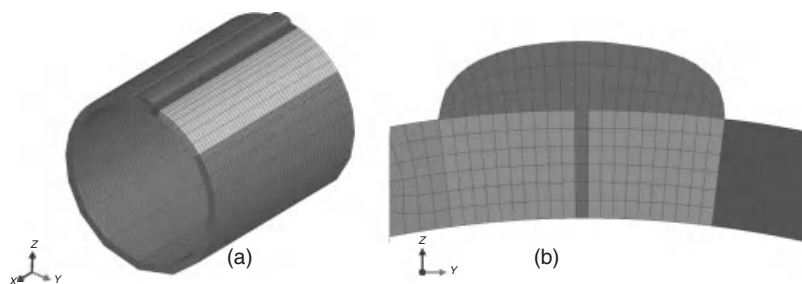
(a) SYSWELD mesh of the weld assembly including the weld seam and (b) wire definition, according to the chewing gum method.
